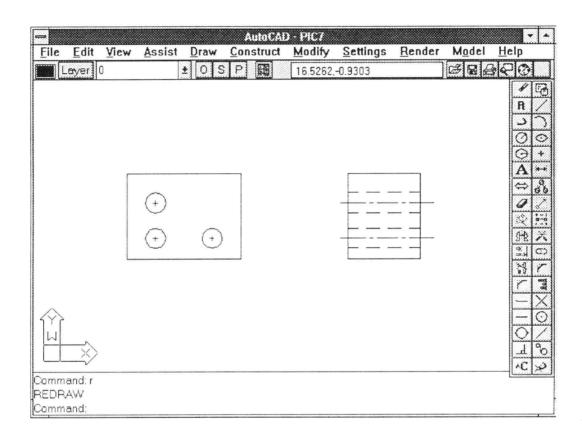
A Part Drawing with the Standard AutoCAD Menu
